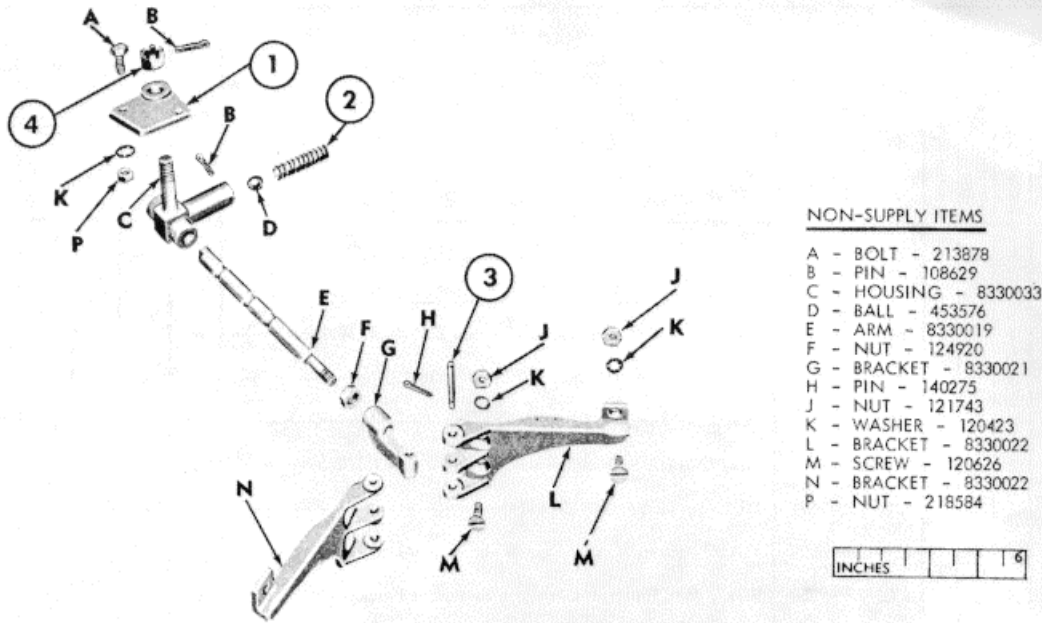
REAR CABINET DOOR STOP-EXPLODED VIEW.
